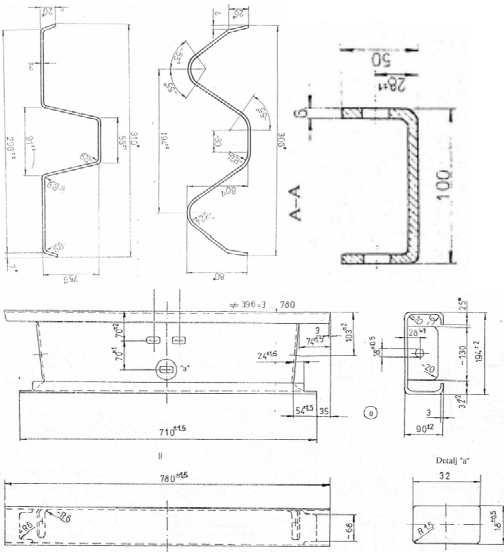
Form and dimensions of guardrail parts. Source MKS U.S.4.
